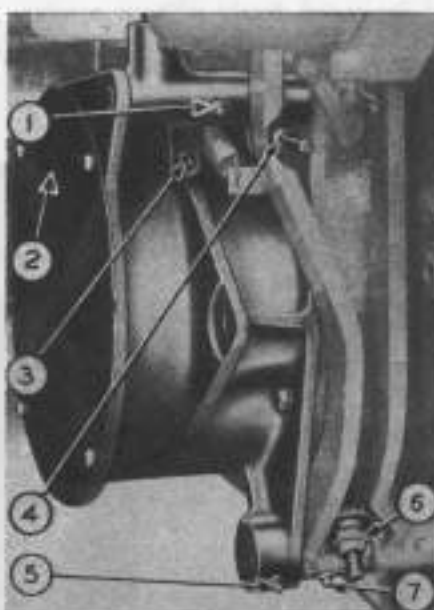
Clutch and double disc brake controls—(44 series equipped with live PTO).
